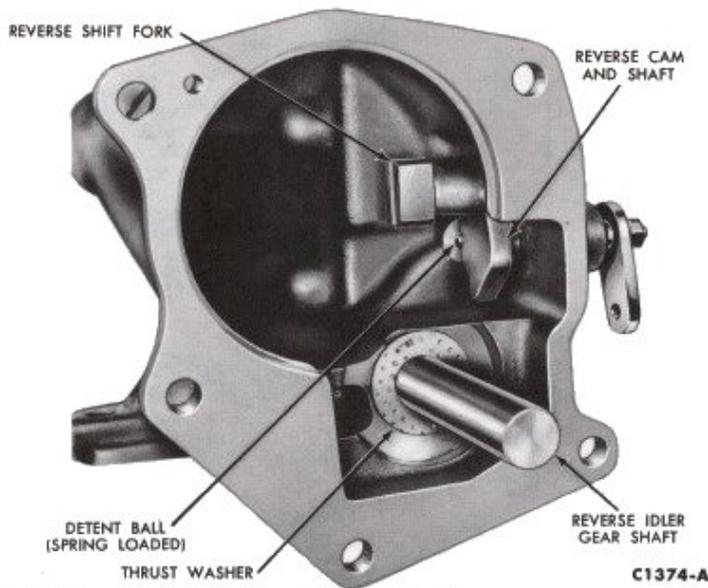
Reverse Idler Shaft and Shift Mechanism
